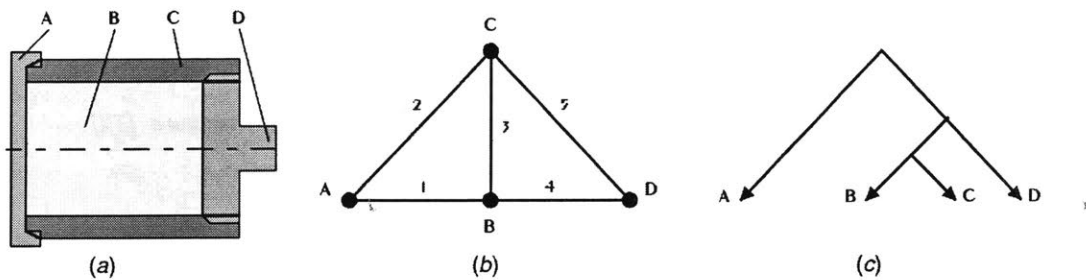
Connection diagram (b) and disassembly tree (c) for example assembly drawing in (a) [70]
